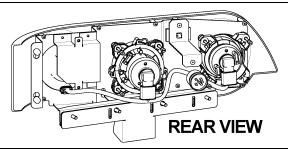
HEADLIGHT ASSEMBLY REAR VIEW 06548
